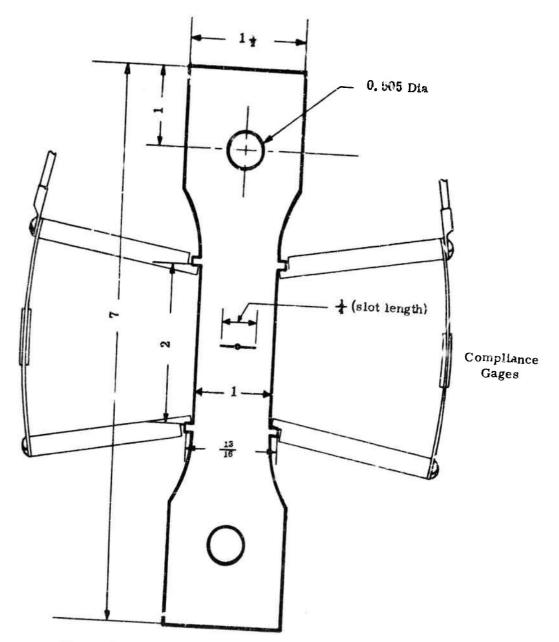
Fracture-Toughness Specimen and Compliance Gage for Sheet Alloys
